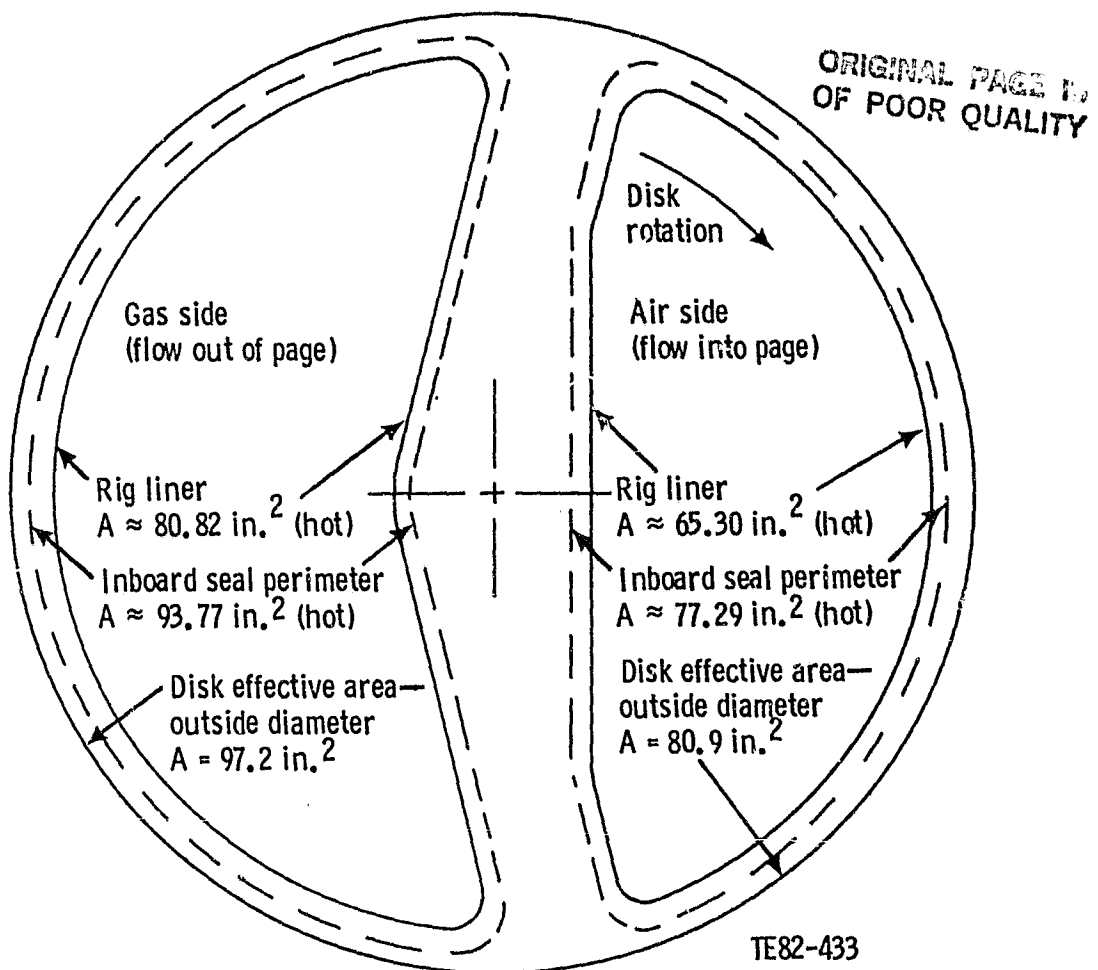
Regenerator disk blockage due to rig liner and inboard seal.
